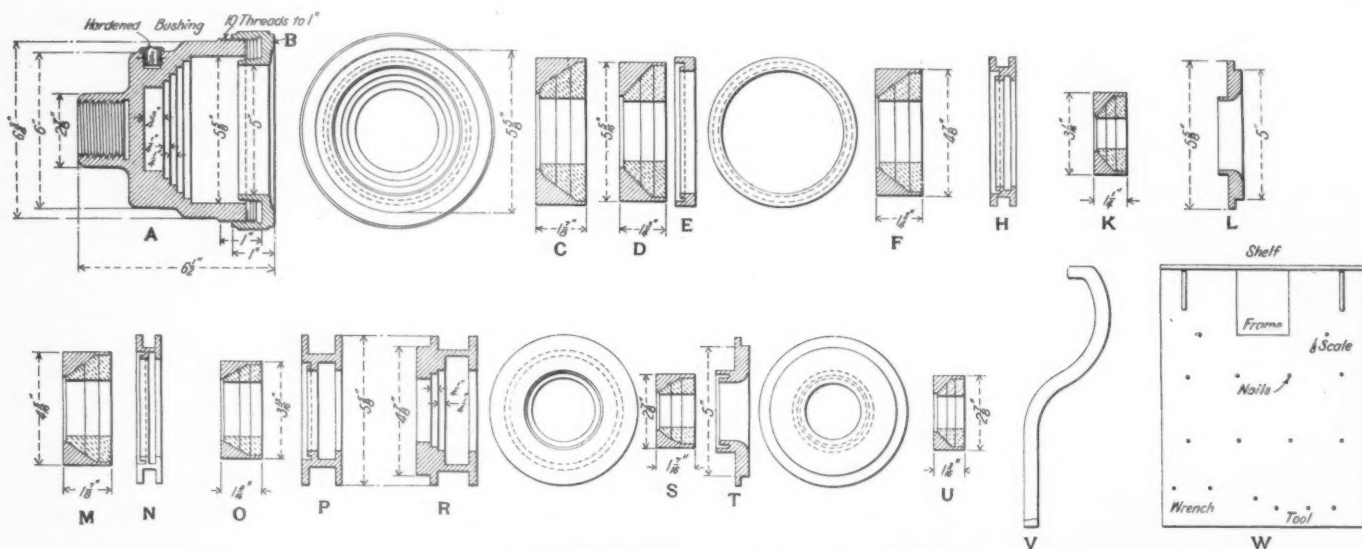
Chuck and Bushings for Boring Rod Packing.
